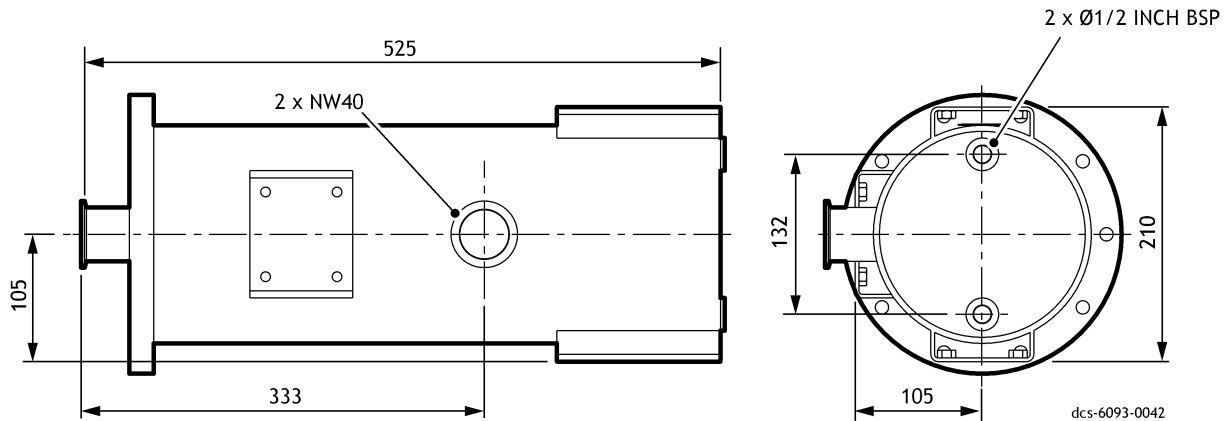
M59838161 GXS exhaust silencer 150 ctrs assembly - carbon steel
